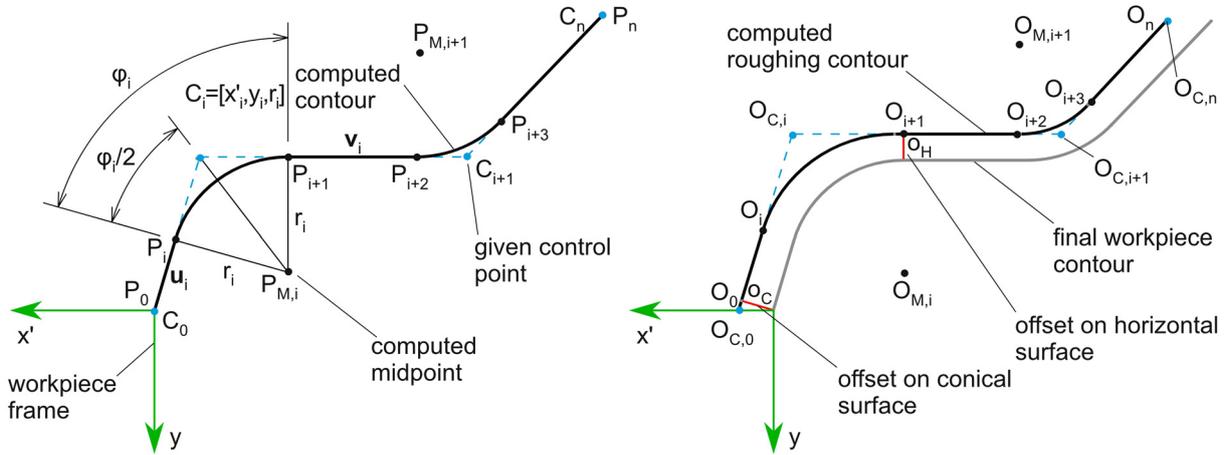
Principle of final (left) and offset (right) workpiece contour
